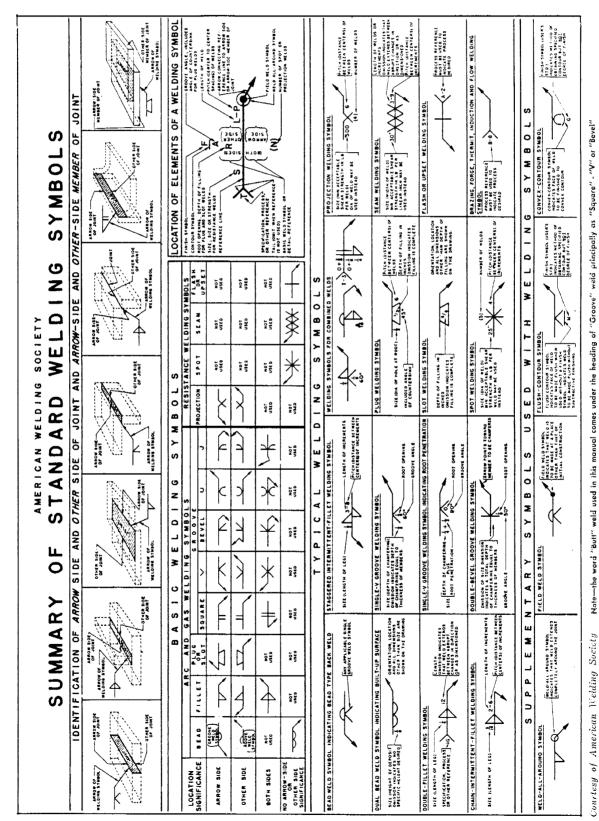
Summary of standard welding symbols (American practice—courtesy of the American Welding Society)
